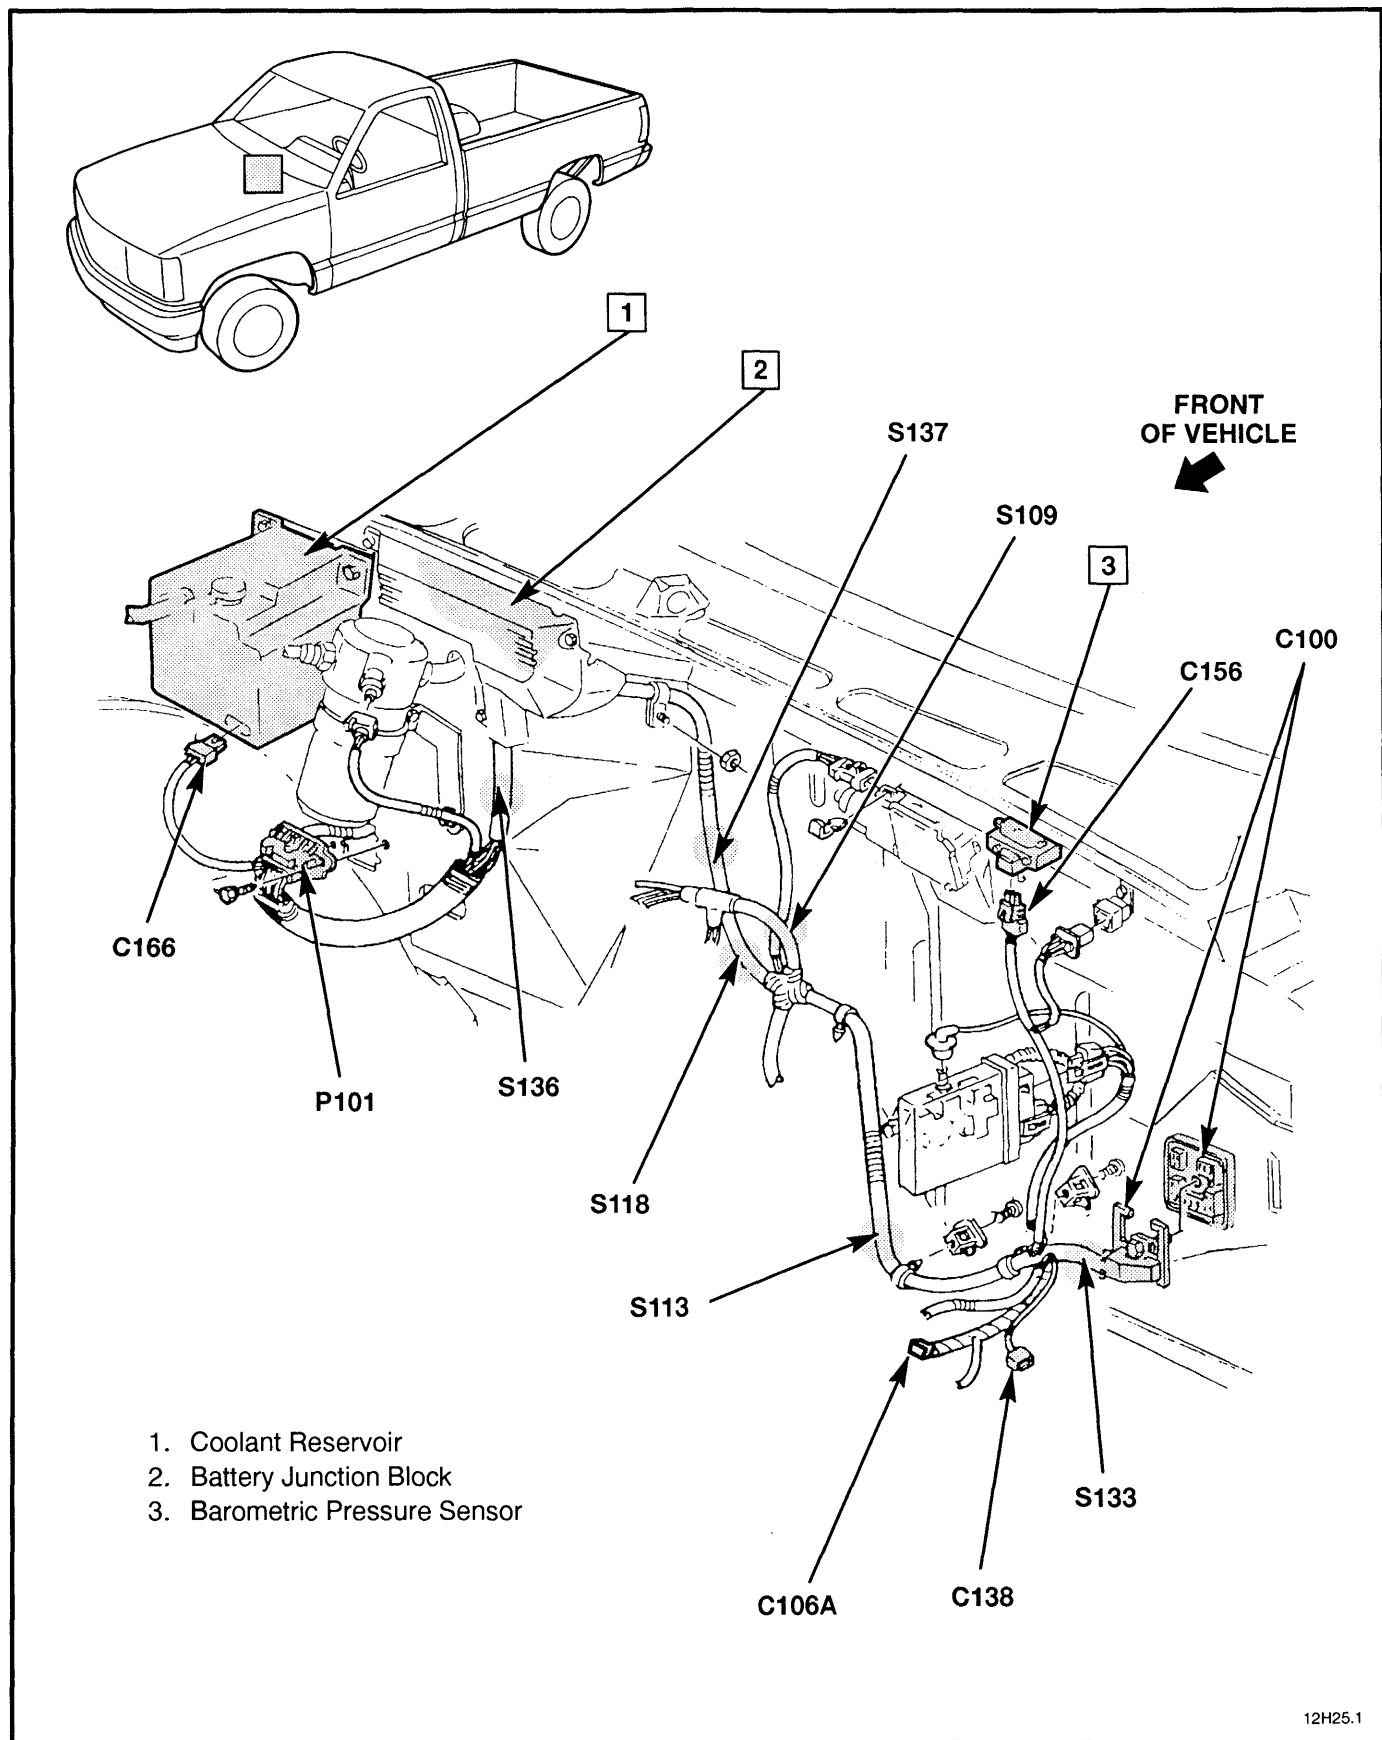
Cowl Wiring, (6.5L) Diesel Engine
